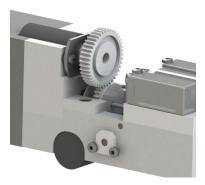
WRIST ROLL ASSEMBLY: INTERFACE DIRECTLY WITH SILS STITCH GEARBOX
